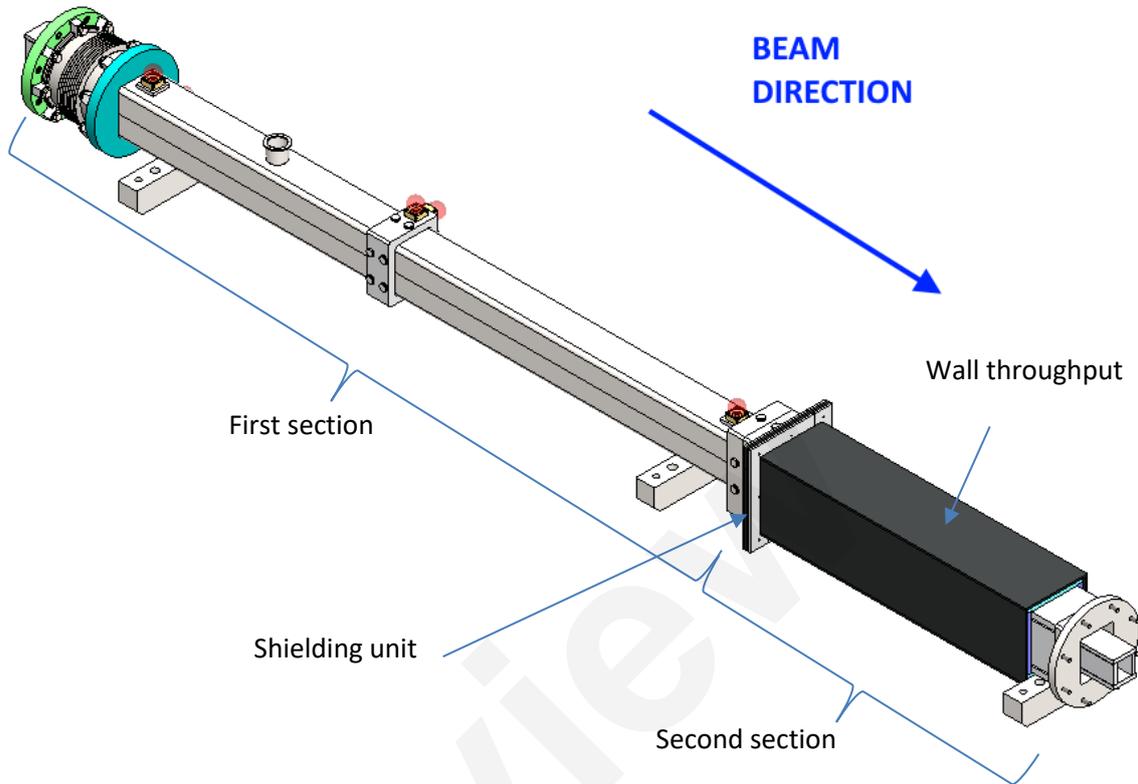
The vacuum housing for W02-19 section of the neutron guide.
